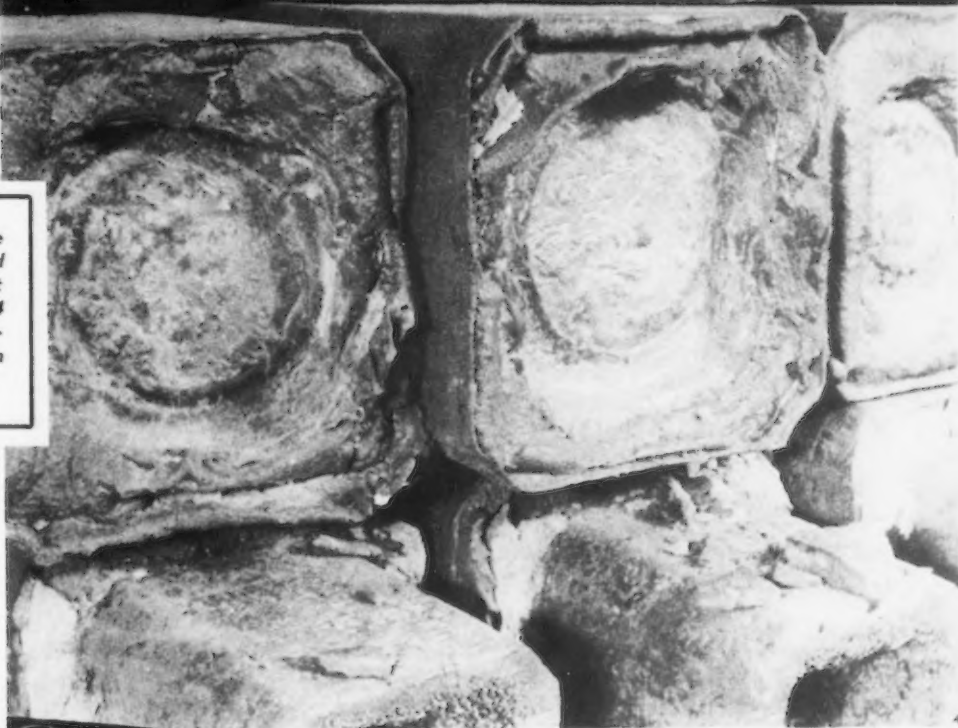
Cross-section of the top end of an electrically hot topped 9x9x40-in. ingot of type 347 stainless steel.
